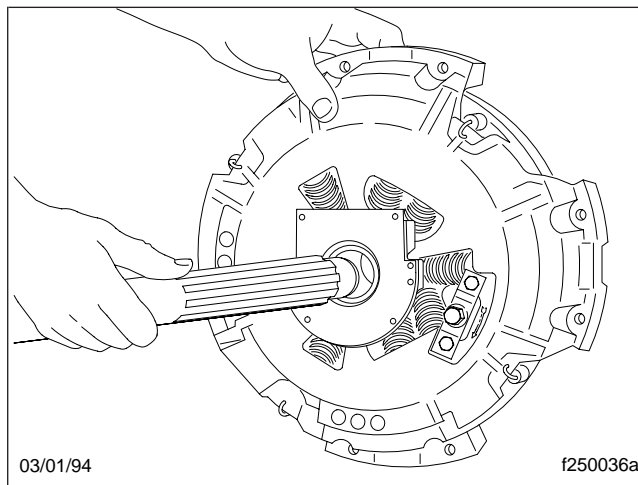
, Insert an Aligning Tool, Easy-Pedal
